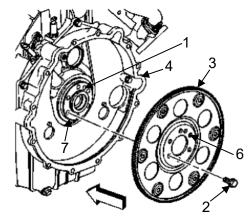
Flexplate (2) to Crankshaft flange (5) Installation.
